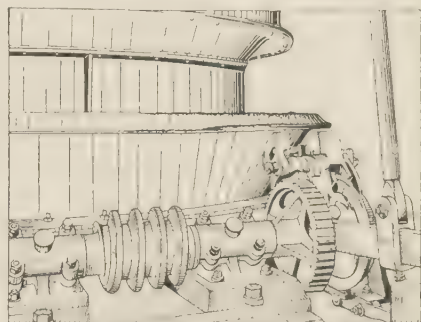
The Hilger Producer. Details of Grate Rotating Gear.
